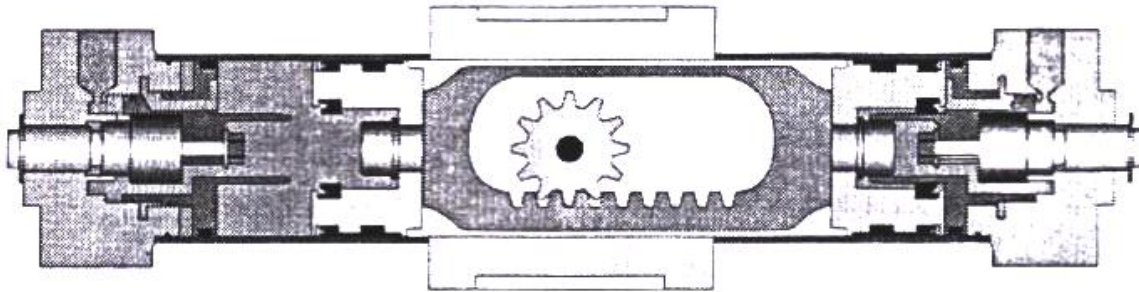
Rotary Actuator- Rack and Pinion Type
